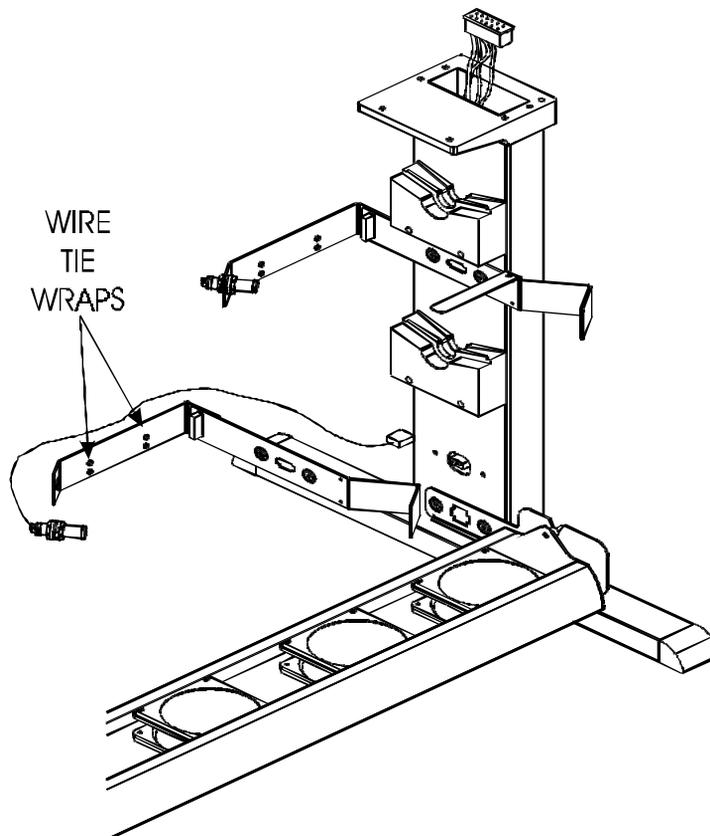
Media Take-Up and Feed Sensor Removal.
